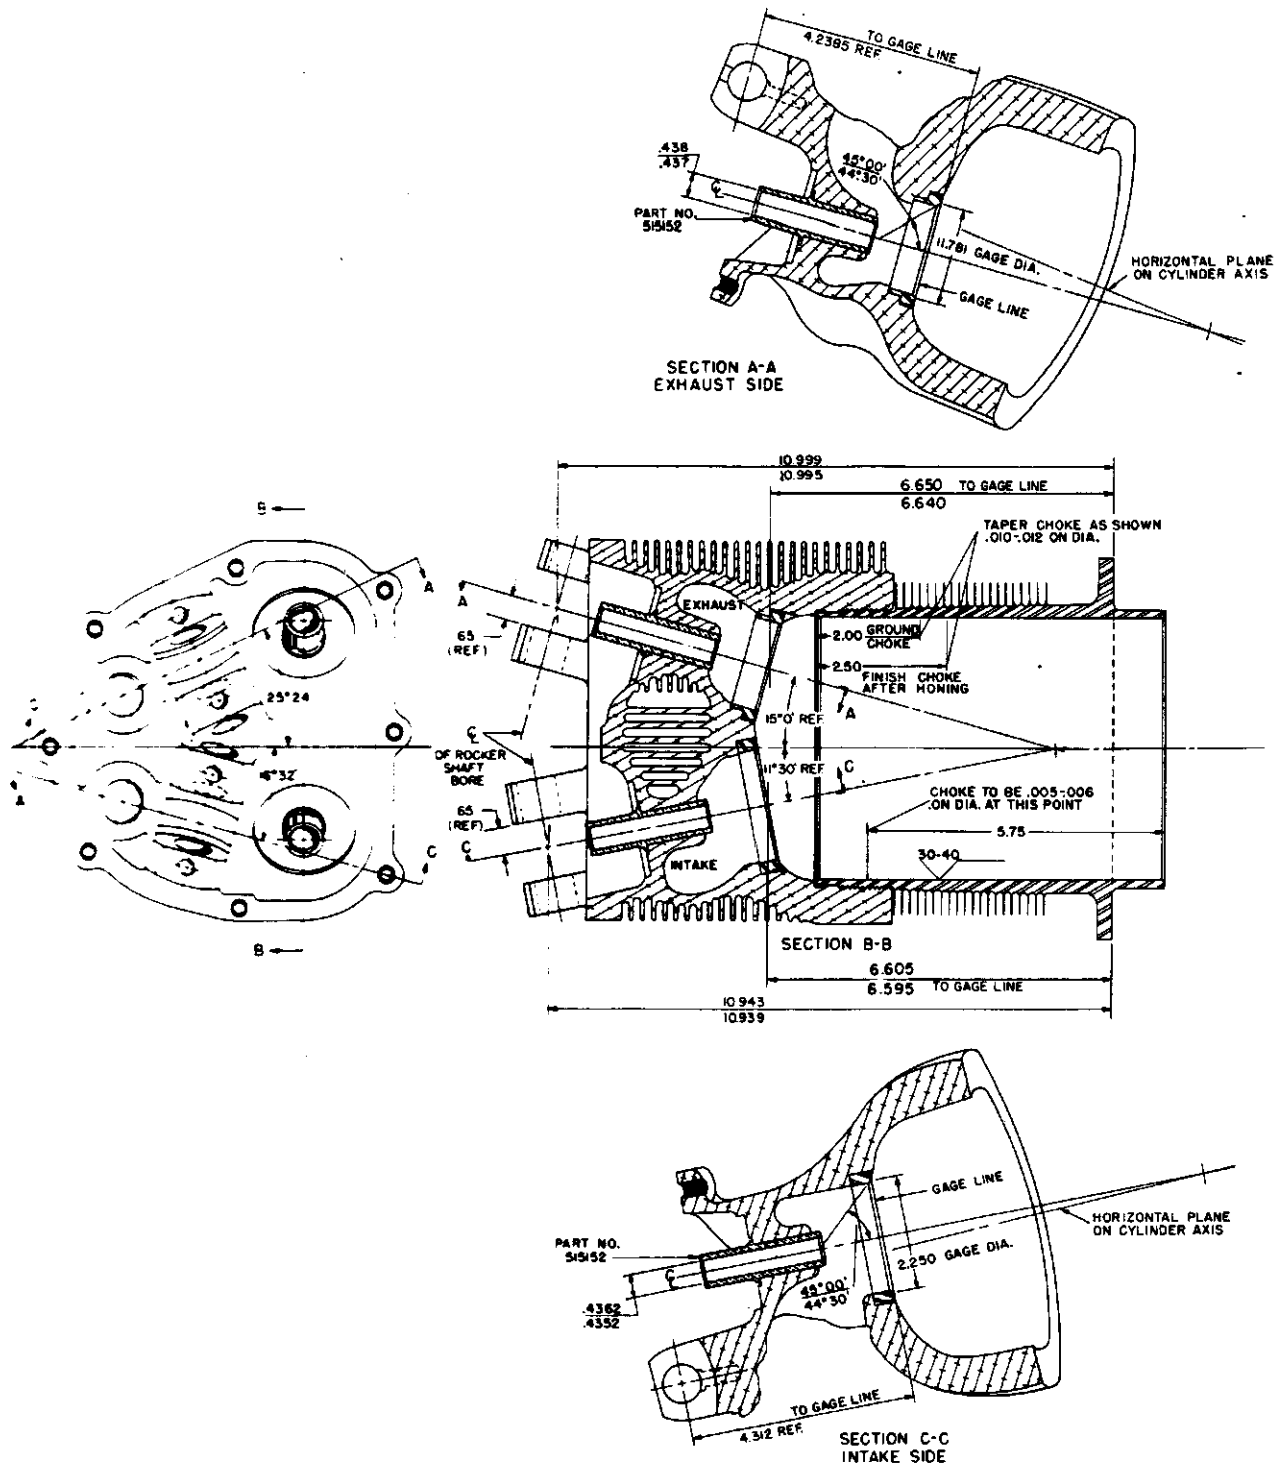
Standard Cylinder Assembly Dimensions, O-470-B
